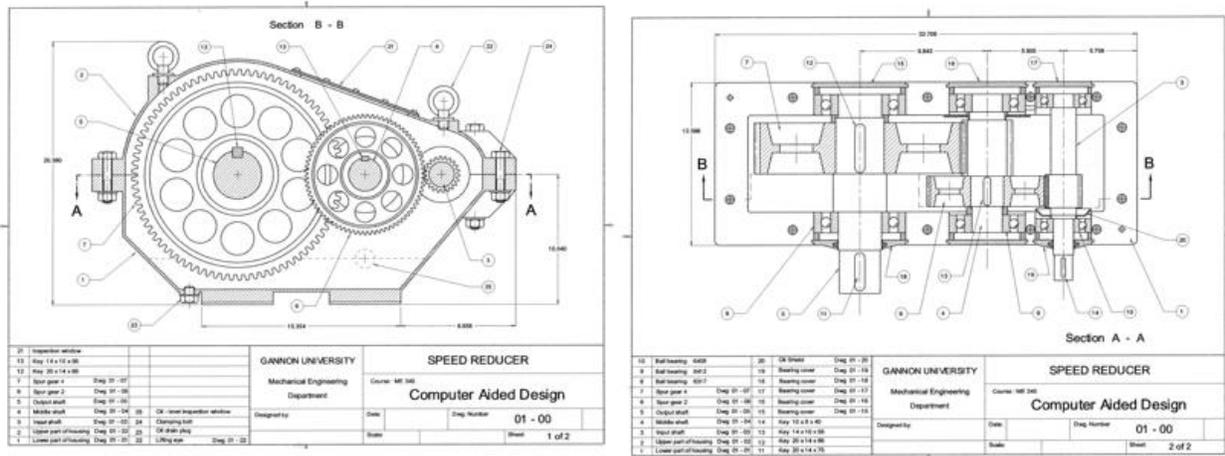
Detailed assembly drawing with BOM and detailed component drawings are required for design project 2 like design project 1.
